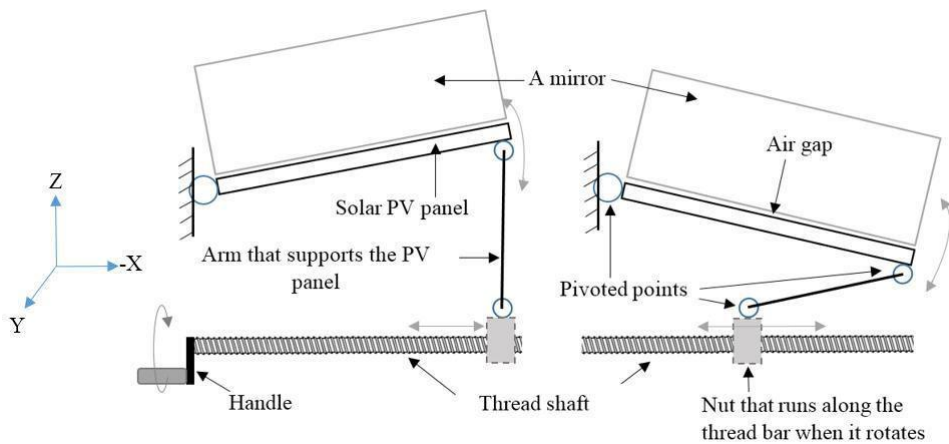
A side view of the solar panel assembly mounted on a threaded shaft.
